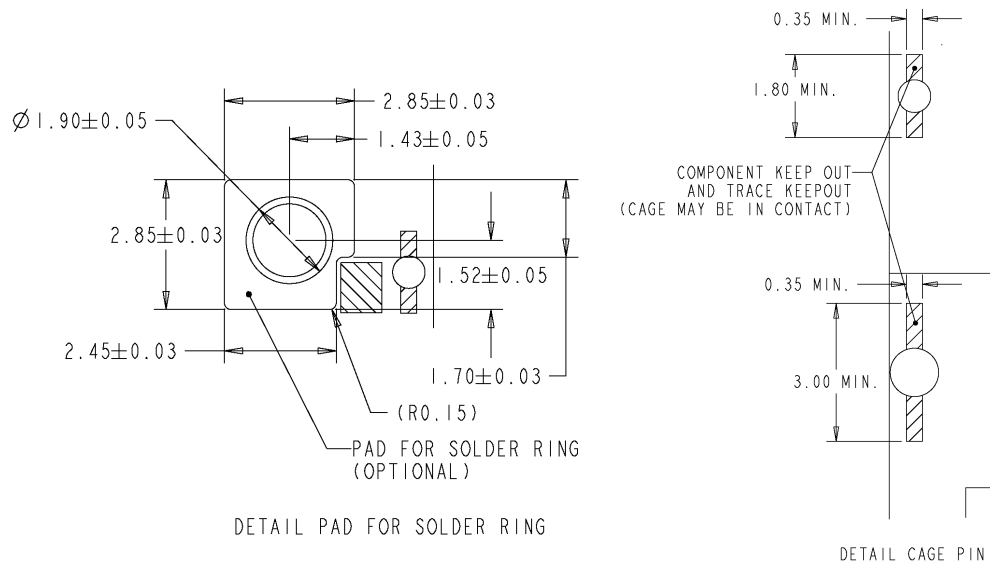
Details of pad for solder ring (left) and cage pin keepout (right)
